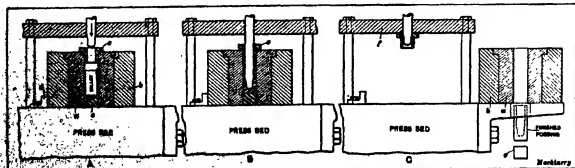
Upsetting method of making shrapnel forgings in one heat and operation.
